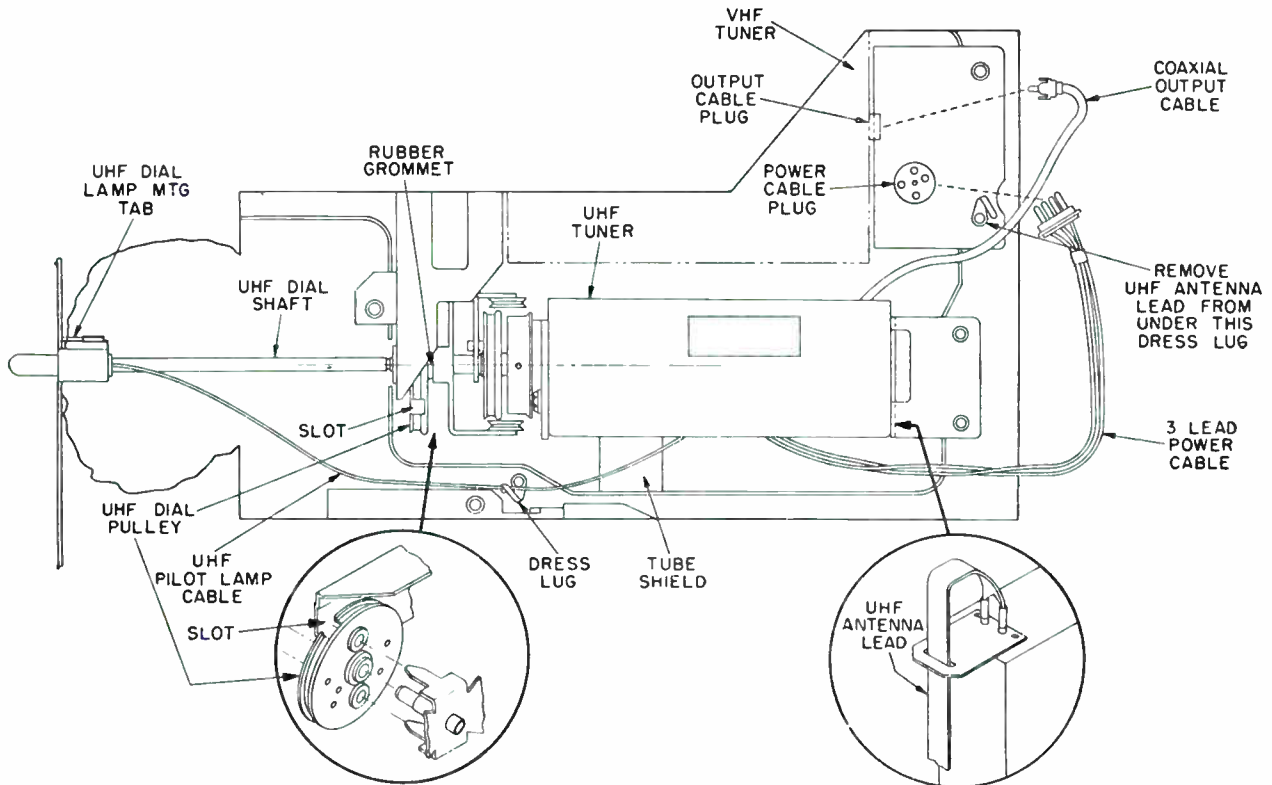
UHF Assembly as Viewed through Bottom of Cabinet
